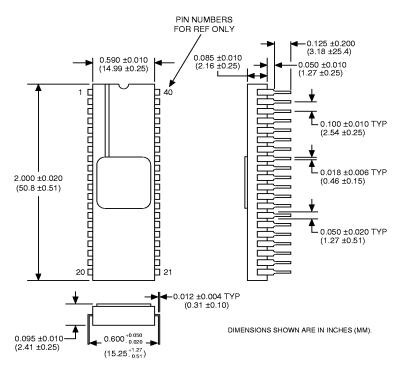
RDC-19220S (40-PIN DDIP) CERAMIC PACKAGE MECHANICAL OUTLINE
